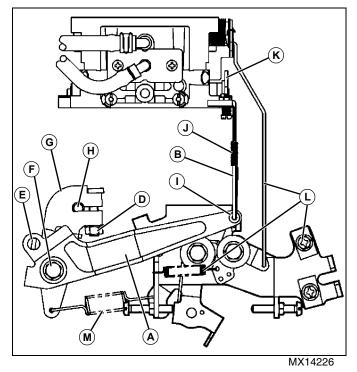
D engine shown; FD750D engine does not have choke assembly.
